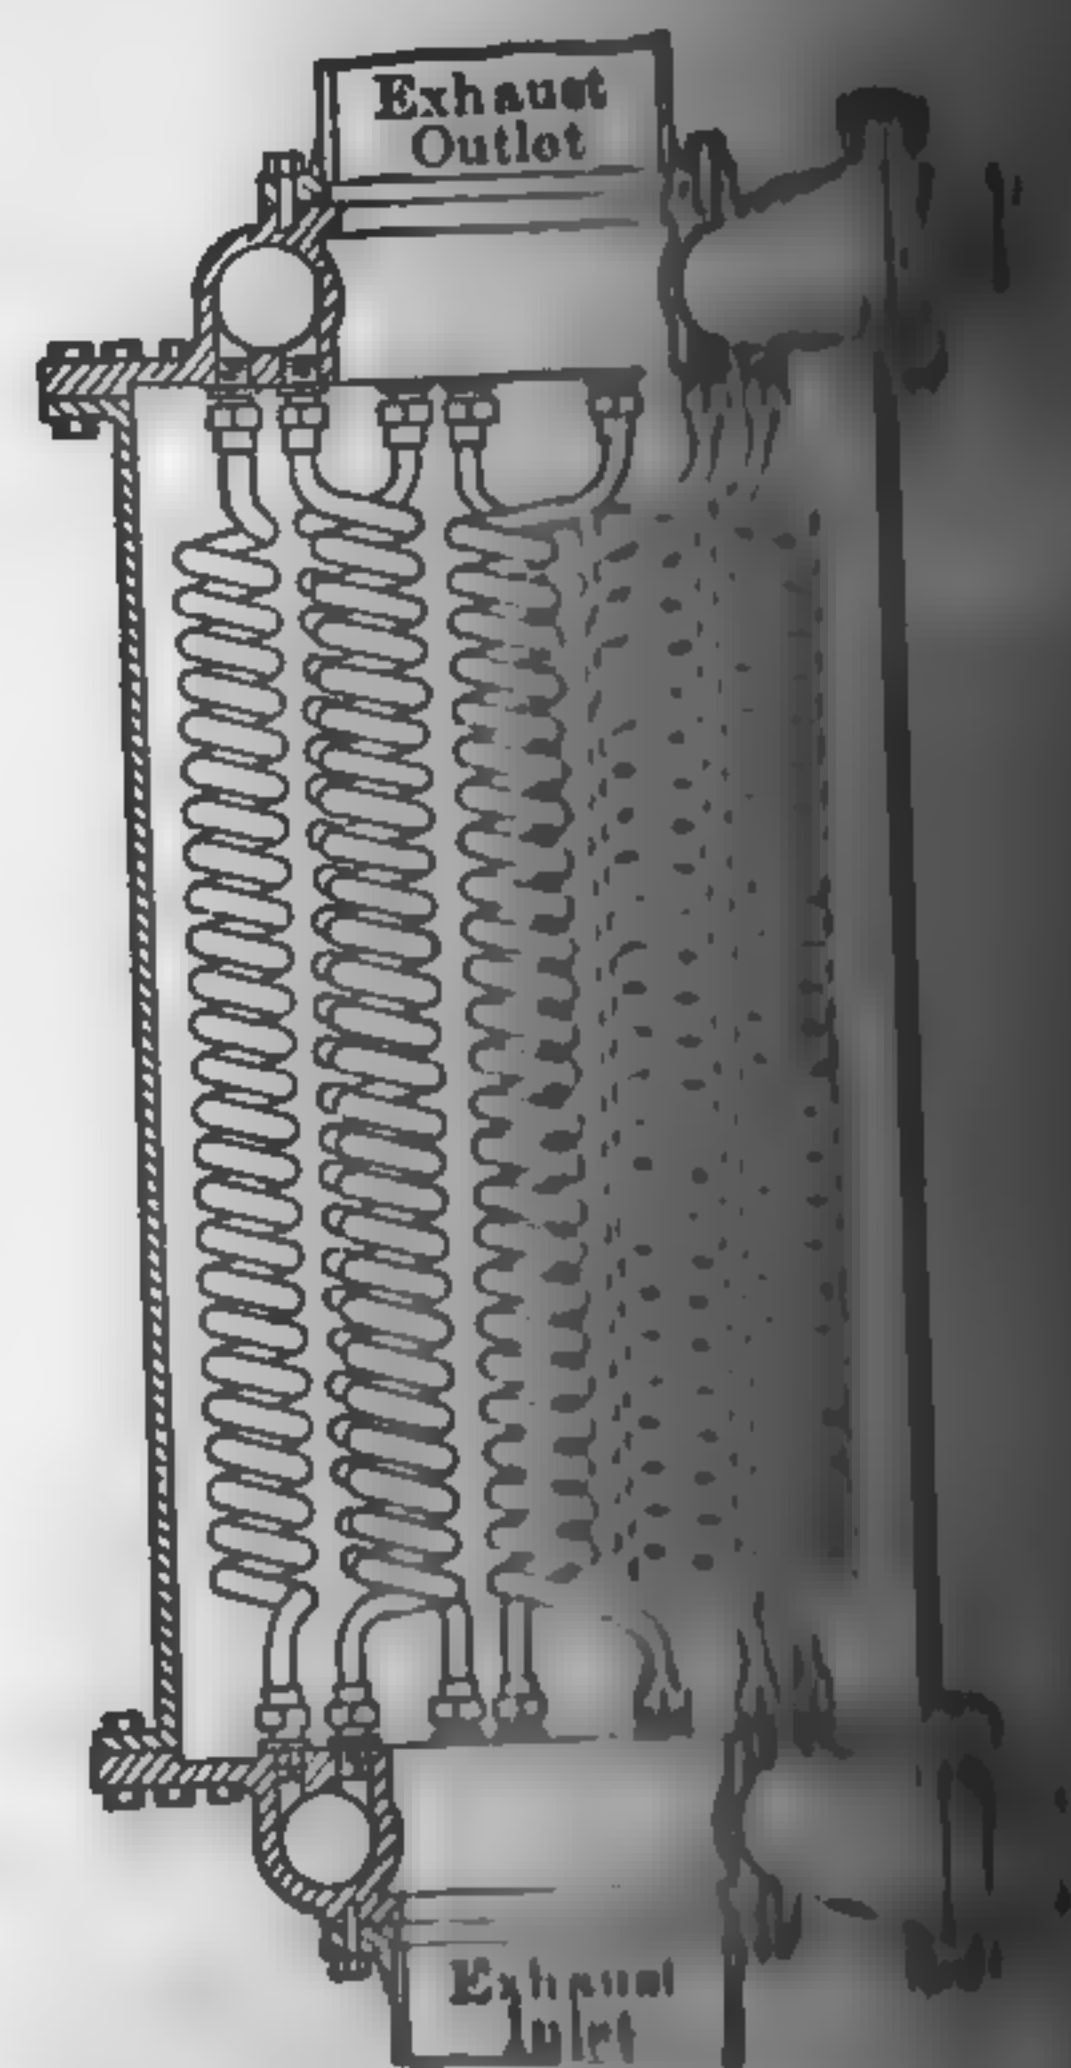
Typical Multi-tube Closed Heater. (Heath.)
